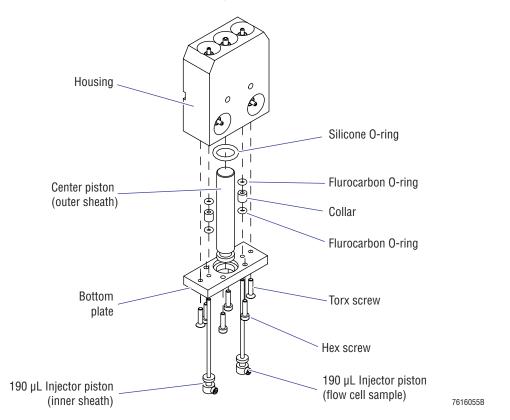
Bottom Plate and Attachments - Housing Removed
